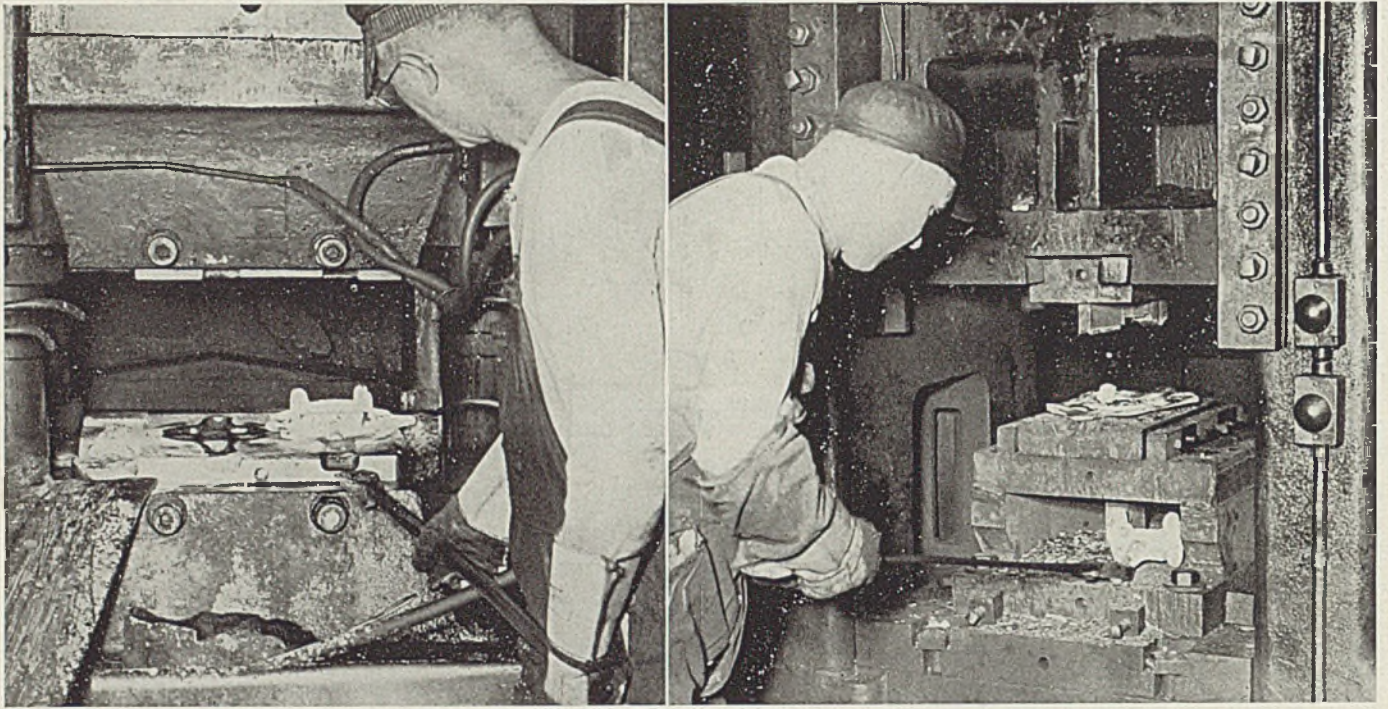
(Left)—2000-ton Ajax press is used to forge two steering knuckles from each piece of stock. Dies have three working positions. First, at left, spreads the material, second rough forges to shape, third finishes shape. Fig. 10. (Right)—Flash is trimmed off and the two forgings parted in this new type press which handles both operations simultaneously
